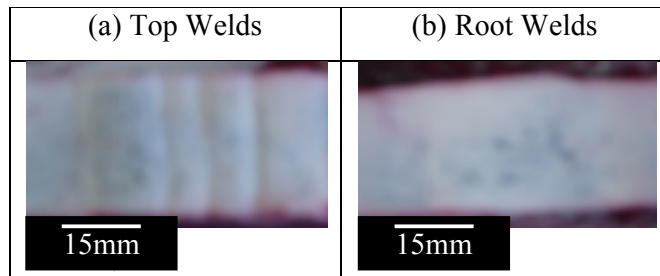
Liquid Penetrant Inspection of Specimen 3
